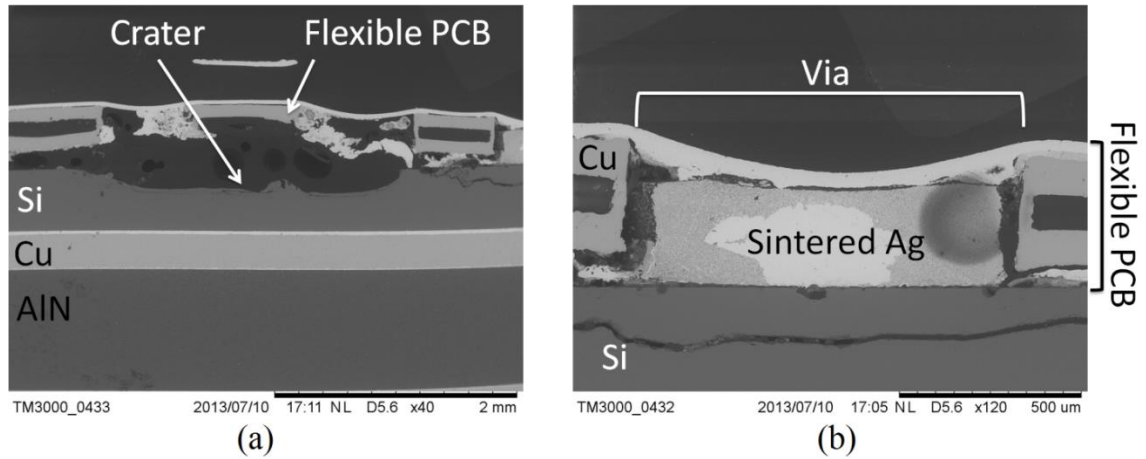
SEM of the test vehicle which attained SCFM at 312.5 J (a) the cross-section showing crater (b) contact interface between Si die top and flexible PCB.
